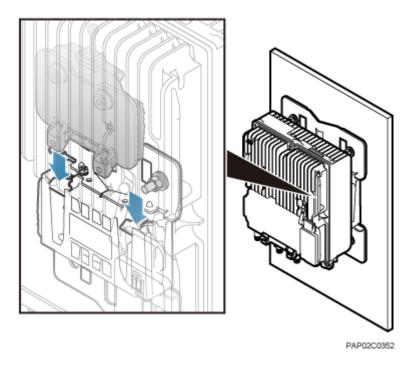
Installing the BTS3902E on the main mounting bracket
